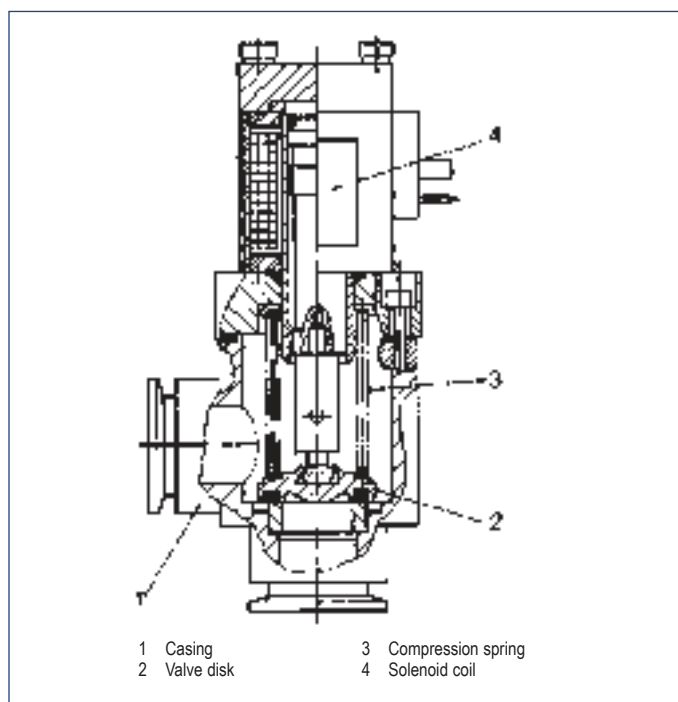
Right angle vacuum valve with solenoid actuator
